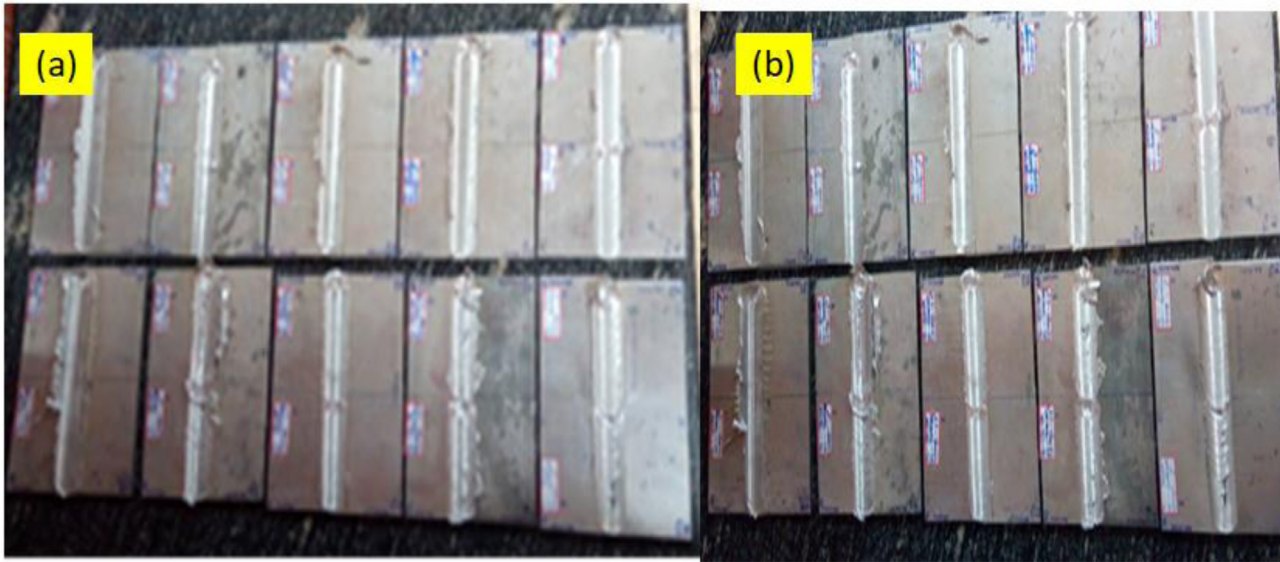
Weldments (a) Tapered tools (b) Tapered threaded tools.
